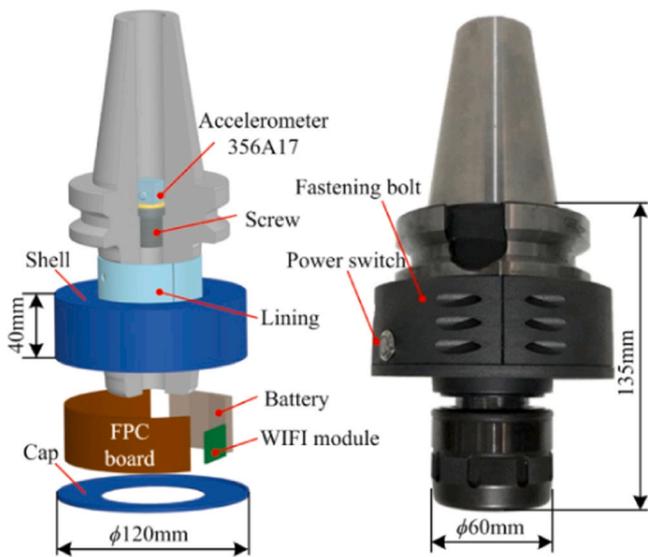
Three-axis accelerometer in the tool holder designed by Zhou et al. [27].
